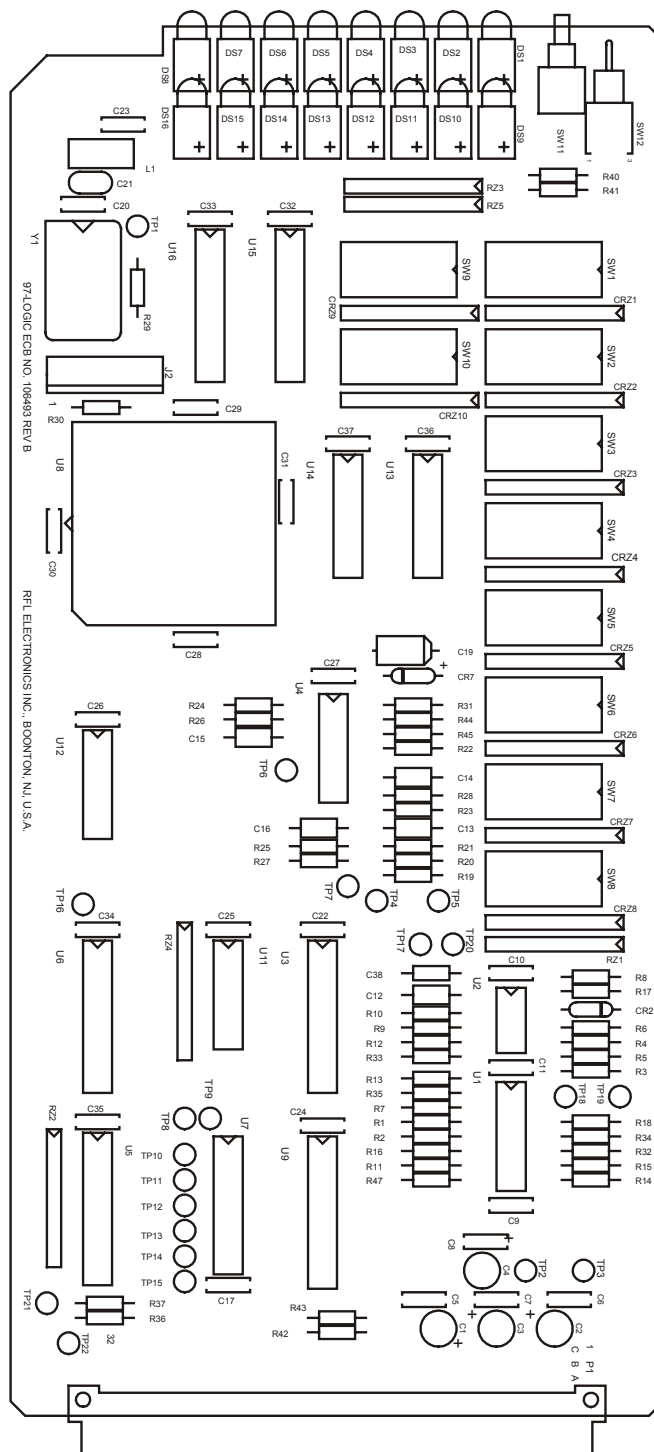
Component locator drawing, RFL 9785 AM Logic Module (Assembly No. 106540)
